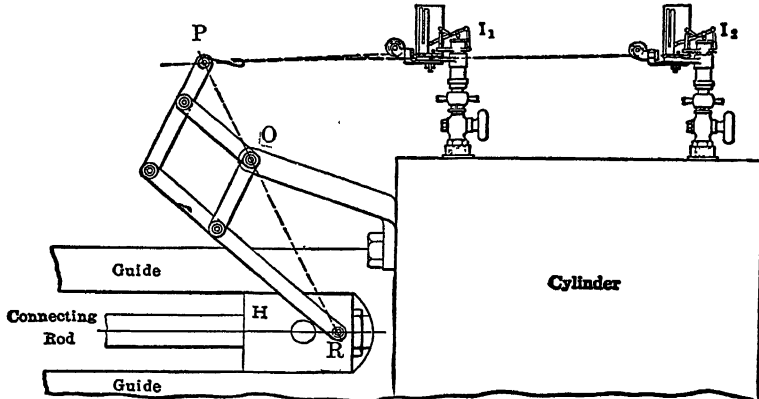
General Arrangement of Indicators and Reducing Mechanism to Take Indicator Diagrams of an Engine.
